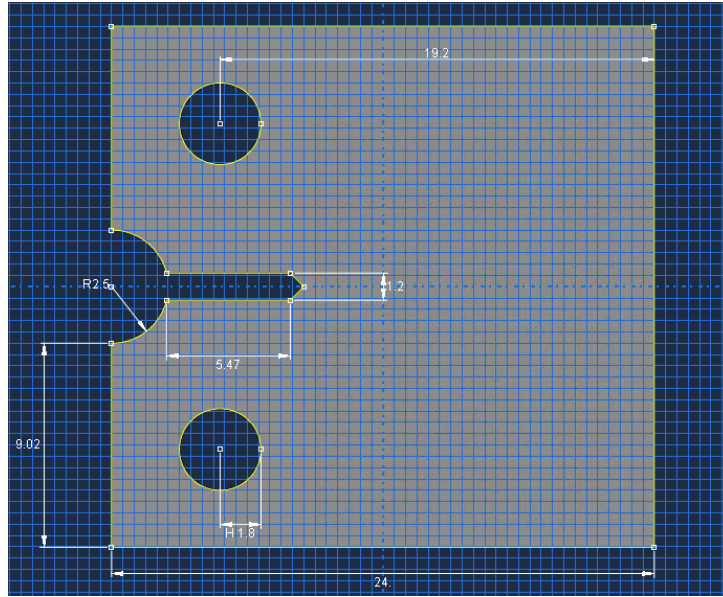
Final compact specimen dimensions utilized for the ABAQUS model.
